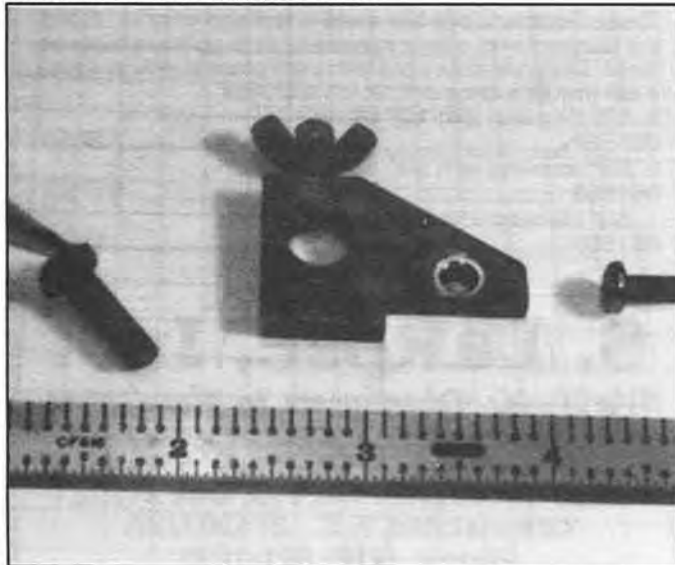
Gauge bracket for cross-slide. Screw indicated is #8-32 for the far right hole. Small screw is a #6-32.
